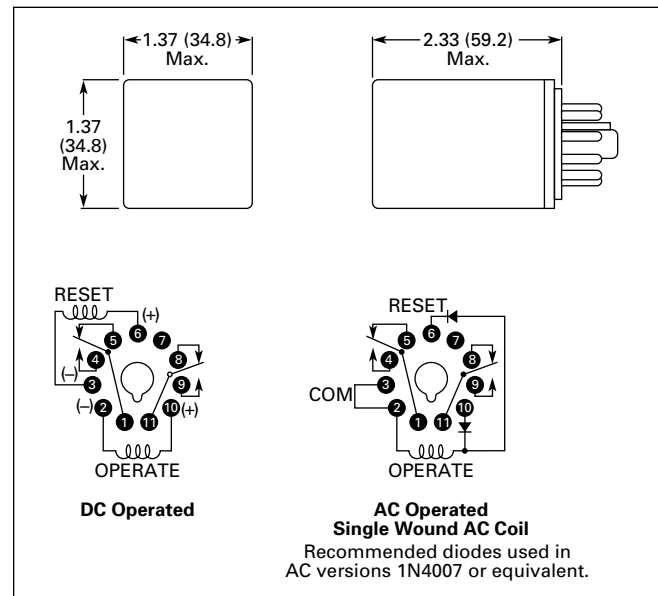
D3PR5 — Approximate Dimensions in Inches (mm)
